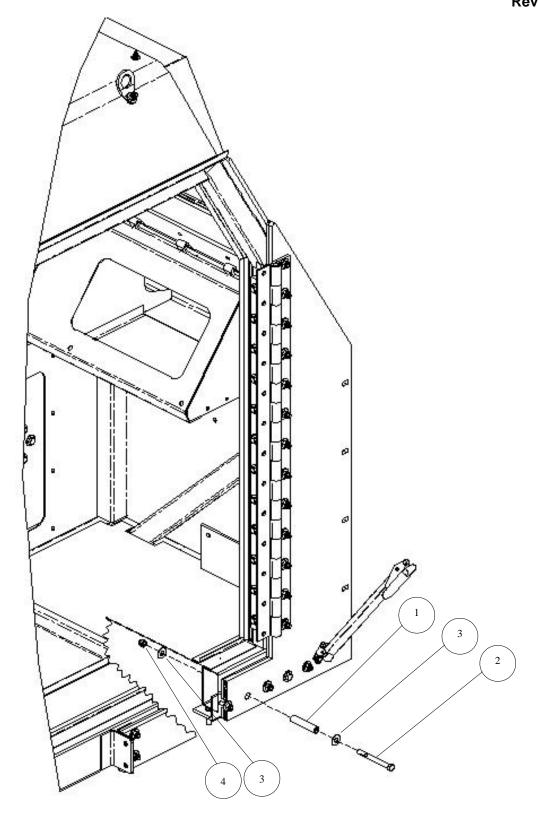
Cab Frame Rail Sleeve Bushing Installation.
